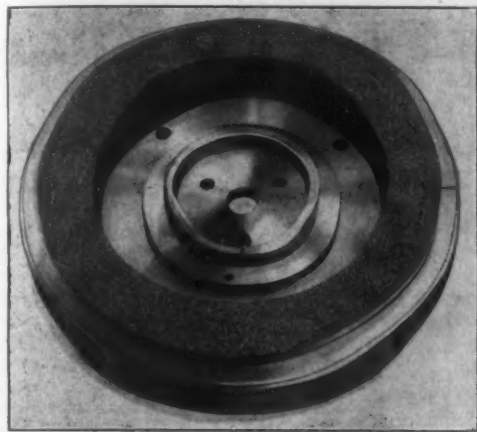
The Helmet Pressed Steel Ring Wheel Chuck Made by Charles H. Besly & Co., Chicago, Ill.
